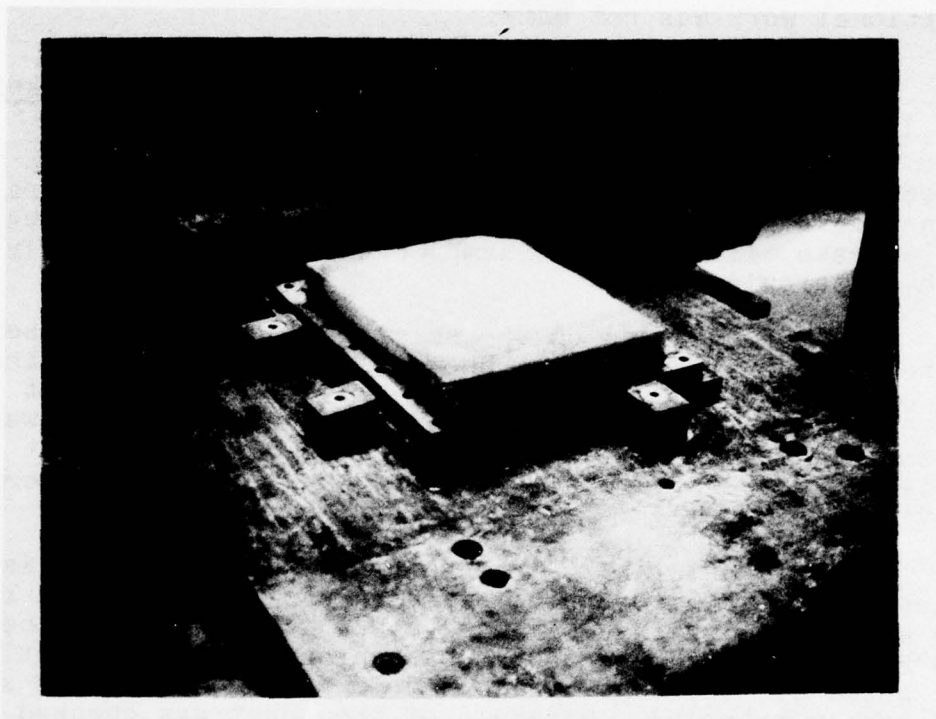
8 in. x 10 in. x 1 in. Compression Molded Block of Interlayer Attached to Skiving Apparatus for Sheeting. Block attached to oscillating table that passes under indexing knife (rear).
